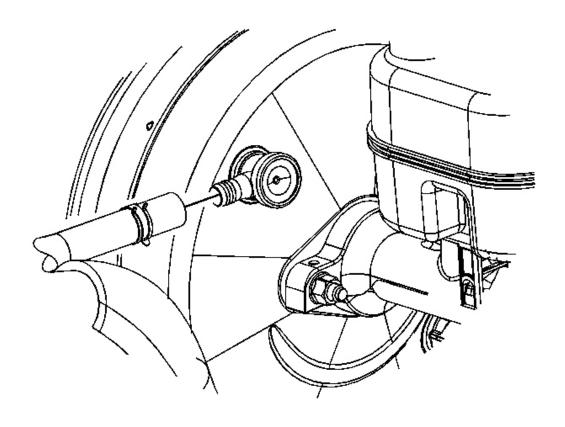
Brake Booster Vacuum Hose Courtesy of GENERAL MOTORS CORP.
